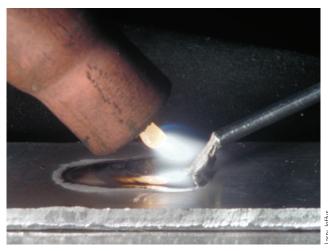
Filler rod being melted before it is added to the molten pool.
